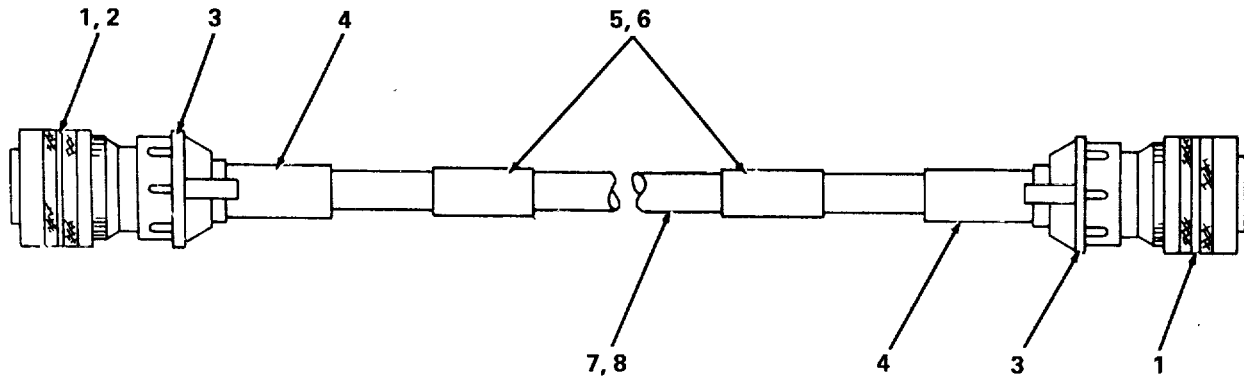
Cable Assemblies 1703-1-3007 (GR1-GR2)
